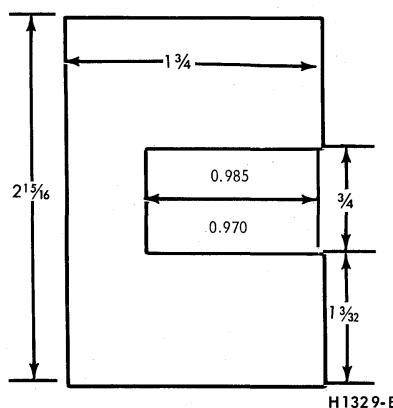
Push Rod Gauge Dimensions Bendix Booster—F-100 and F-250
